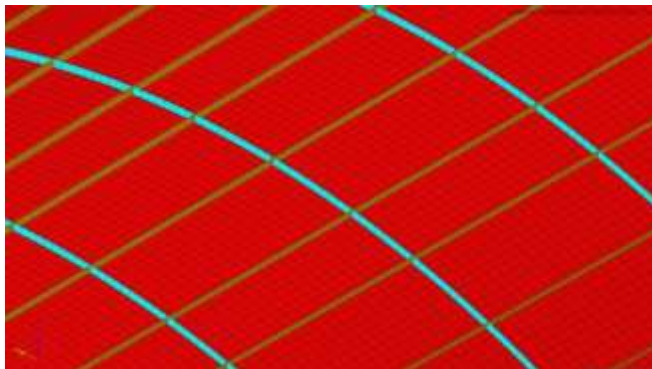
Configuration-2 ortho grid stiffened bypass duct
